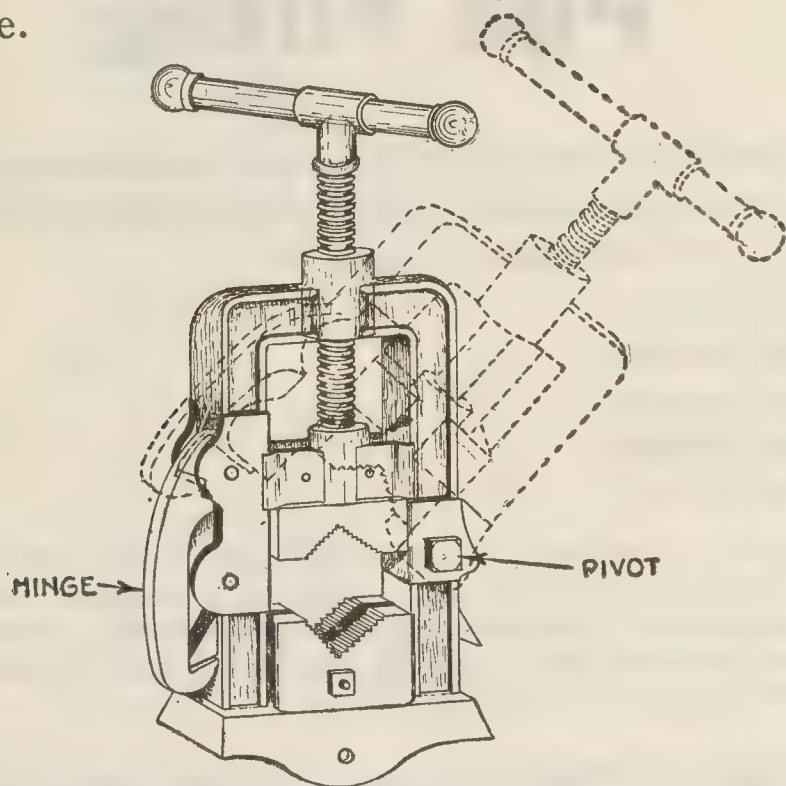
Ordinary pipe vise. *It consists of a plain, or hinged (as shown) U-shape piece containing the clamp screw, the sides of which form guides for the upper jaws. The upper and lower jaws are provided with a series of rectangular teeth as shown. When the U piece is closed over the pipe, pin inserted, the teeth of both jaws are brought in firm contact with the pipe by screwing down the upper jaw thus holding the pipe firmly.
